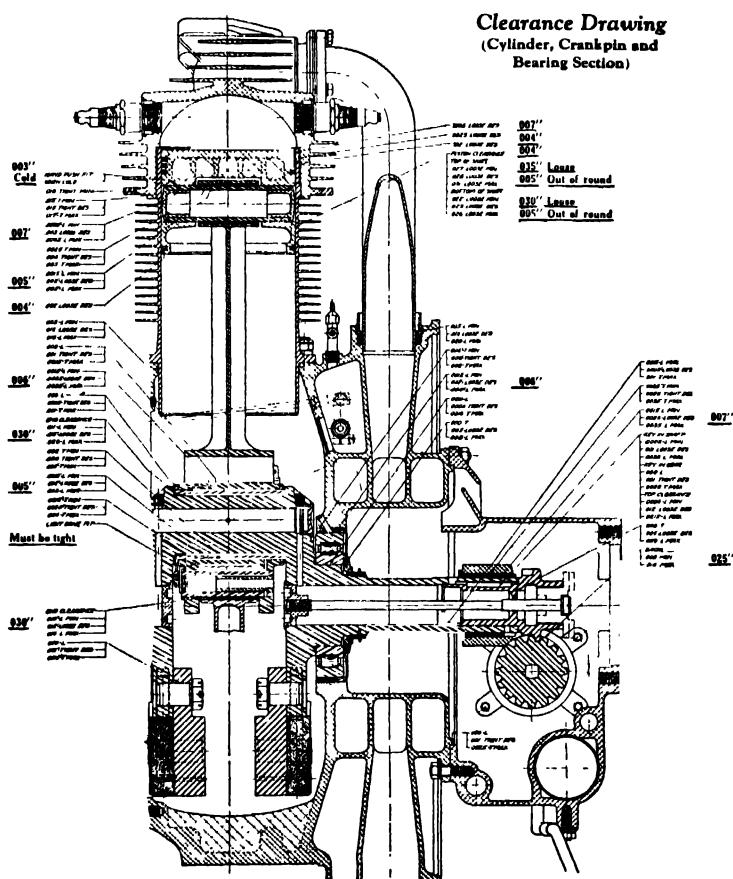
Cylinder, Crankpin and Bearing Section of Wright Model J5 Showing Clearances.
